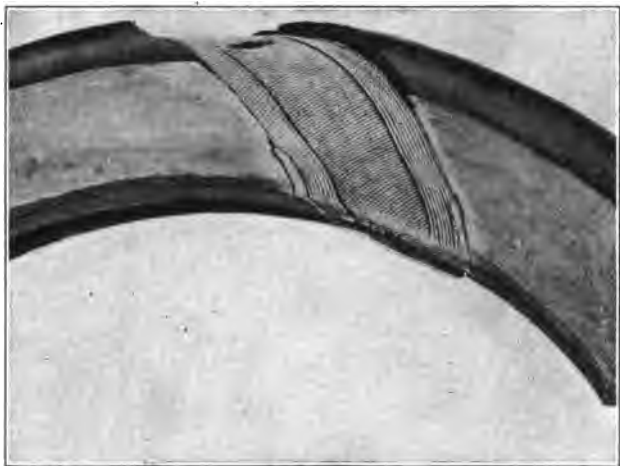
Outer cord section, four ply heavy duty. The outer ply is removed, one inner ply removed and the injury skived. Built with cords or fabric.
